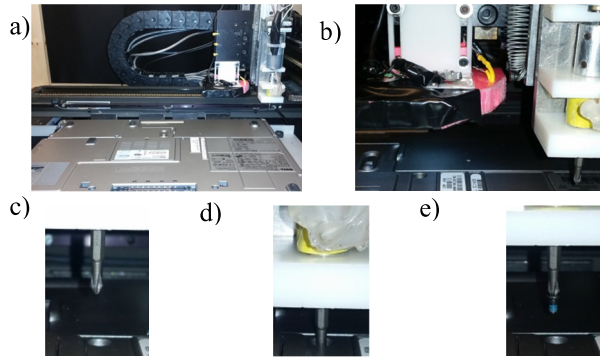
(a) Robot homes itself and finds circles in the workspace. (b) Robot moves the camera with localized lighting over the circle to center a hole. (c) Robot moves the SE screwdriver over the hole. (d) SE screwdriver is lowered into the hole and removes the screw. (e) SE screwdriver removes the screw from the hole.
